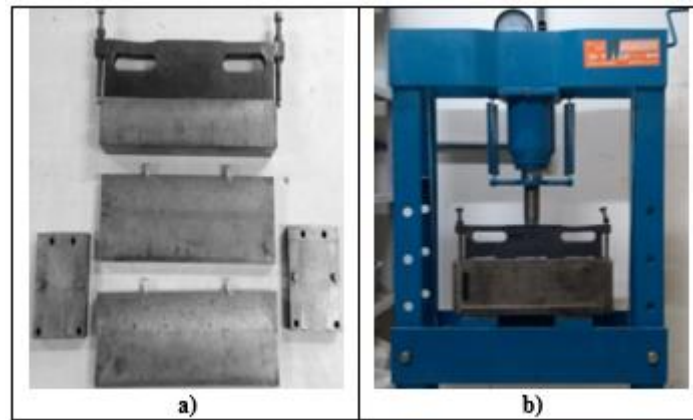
a) metal mold for beam molding and compaction; b) hydraulic press 30 tons.
